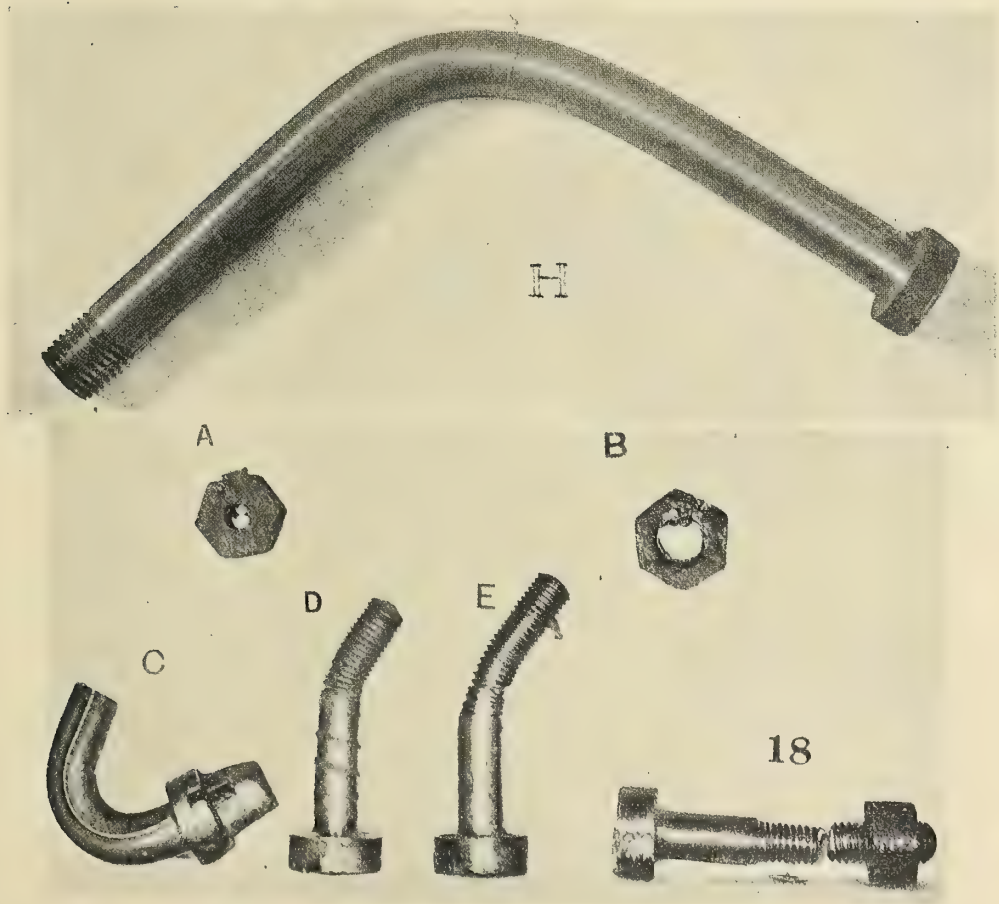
PHYSICAL TESTS OF BOLTS USED IN SHEATHING.
